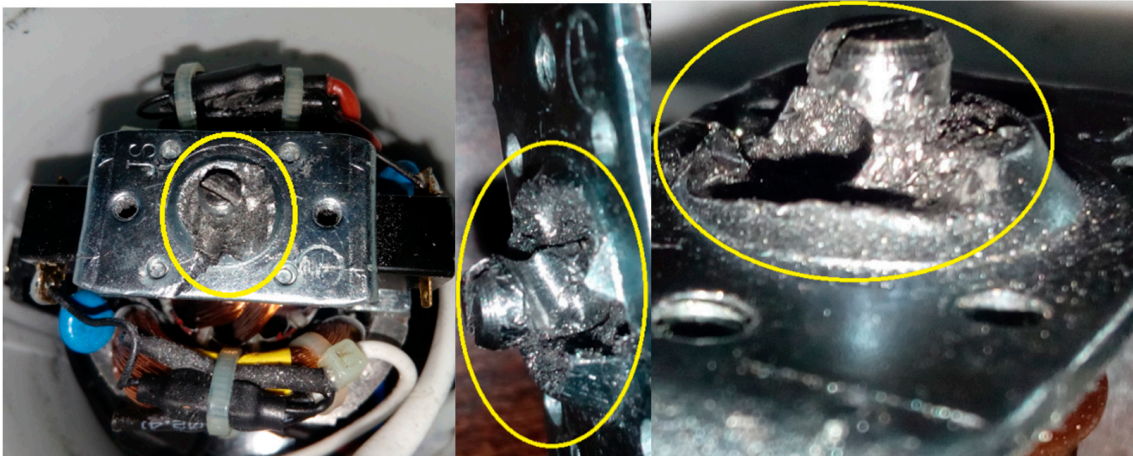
CG-A with a damaged shaft and heavily damaged rear sliding bearing (indicated by yellow circle).
